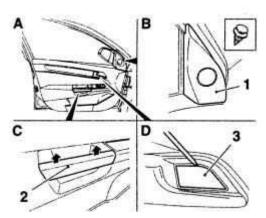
Removing the front door linings: 1 - the outer lining the front speakers, 2 - door armrest pad assembly, 3 - lining the interior door handle
